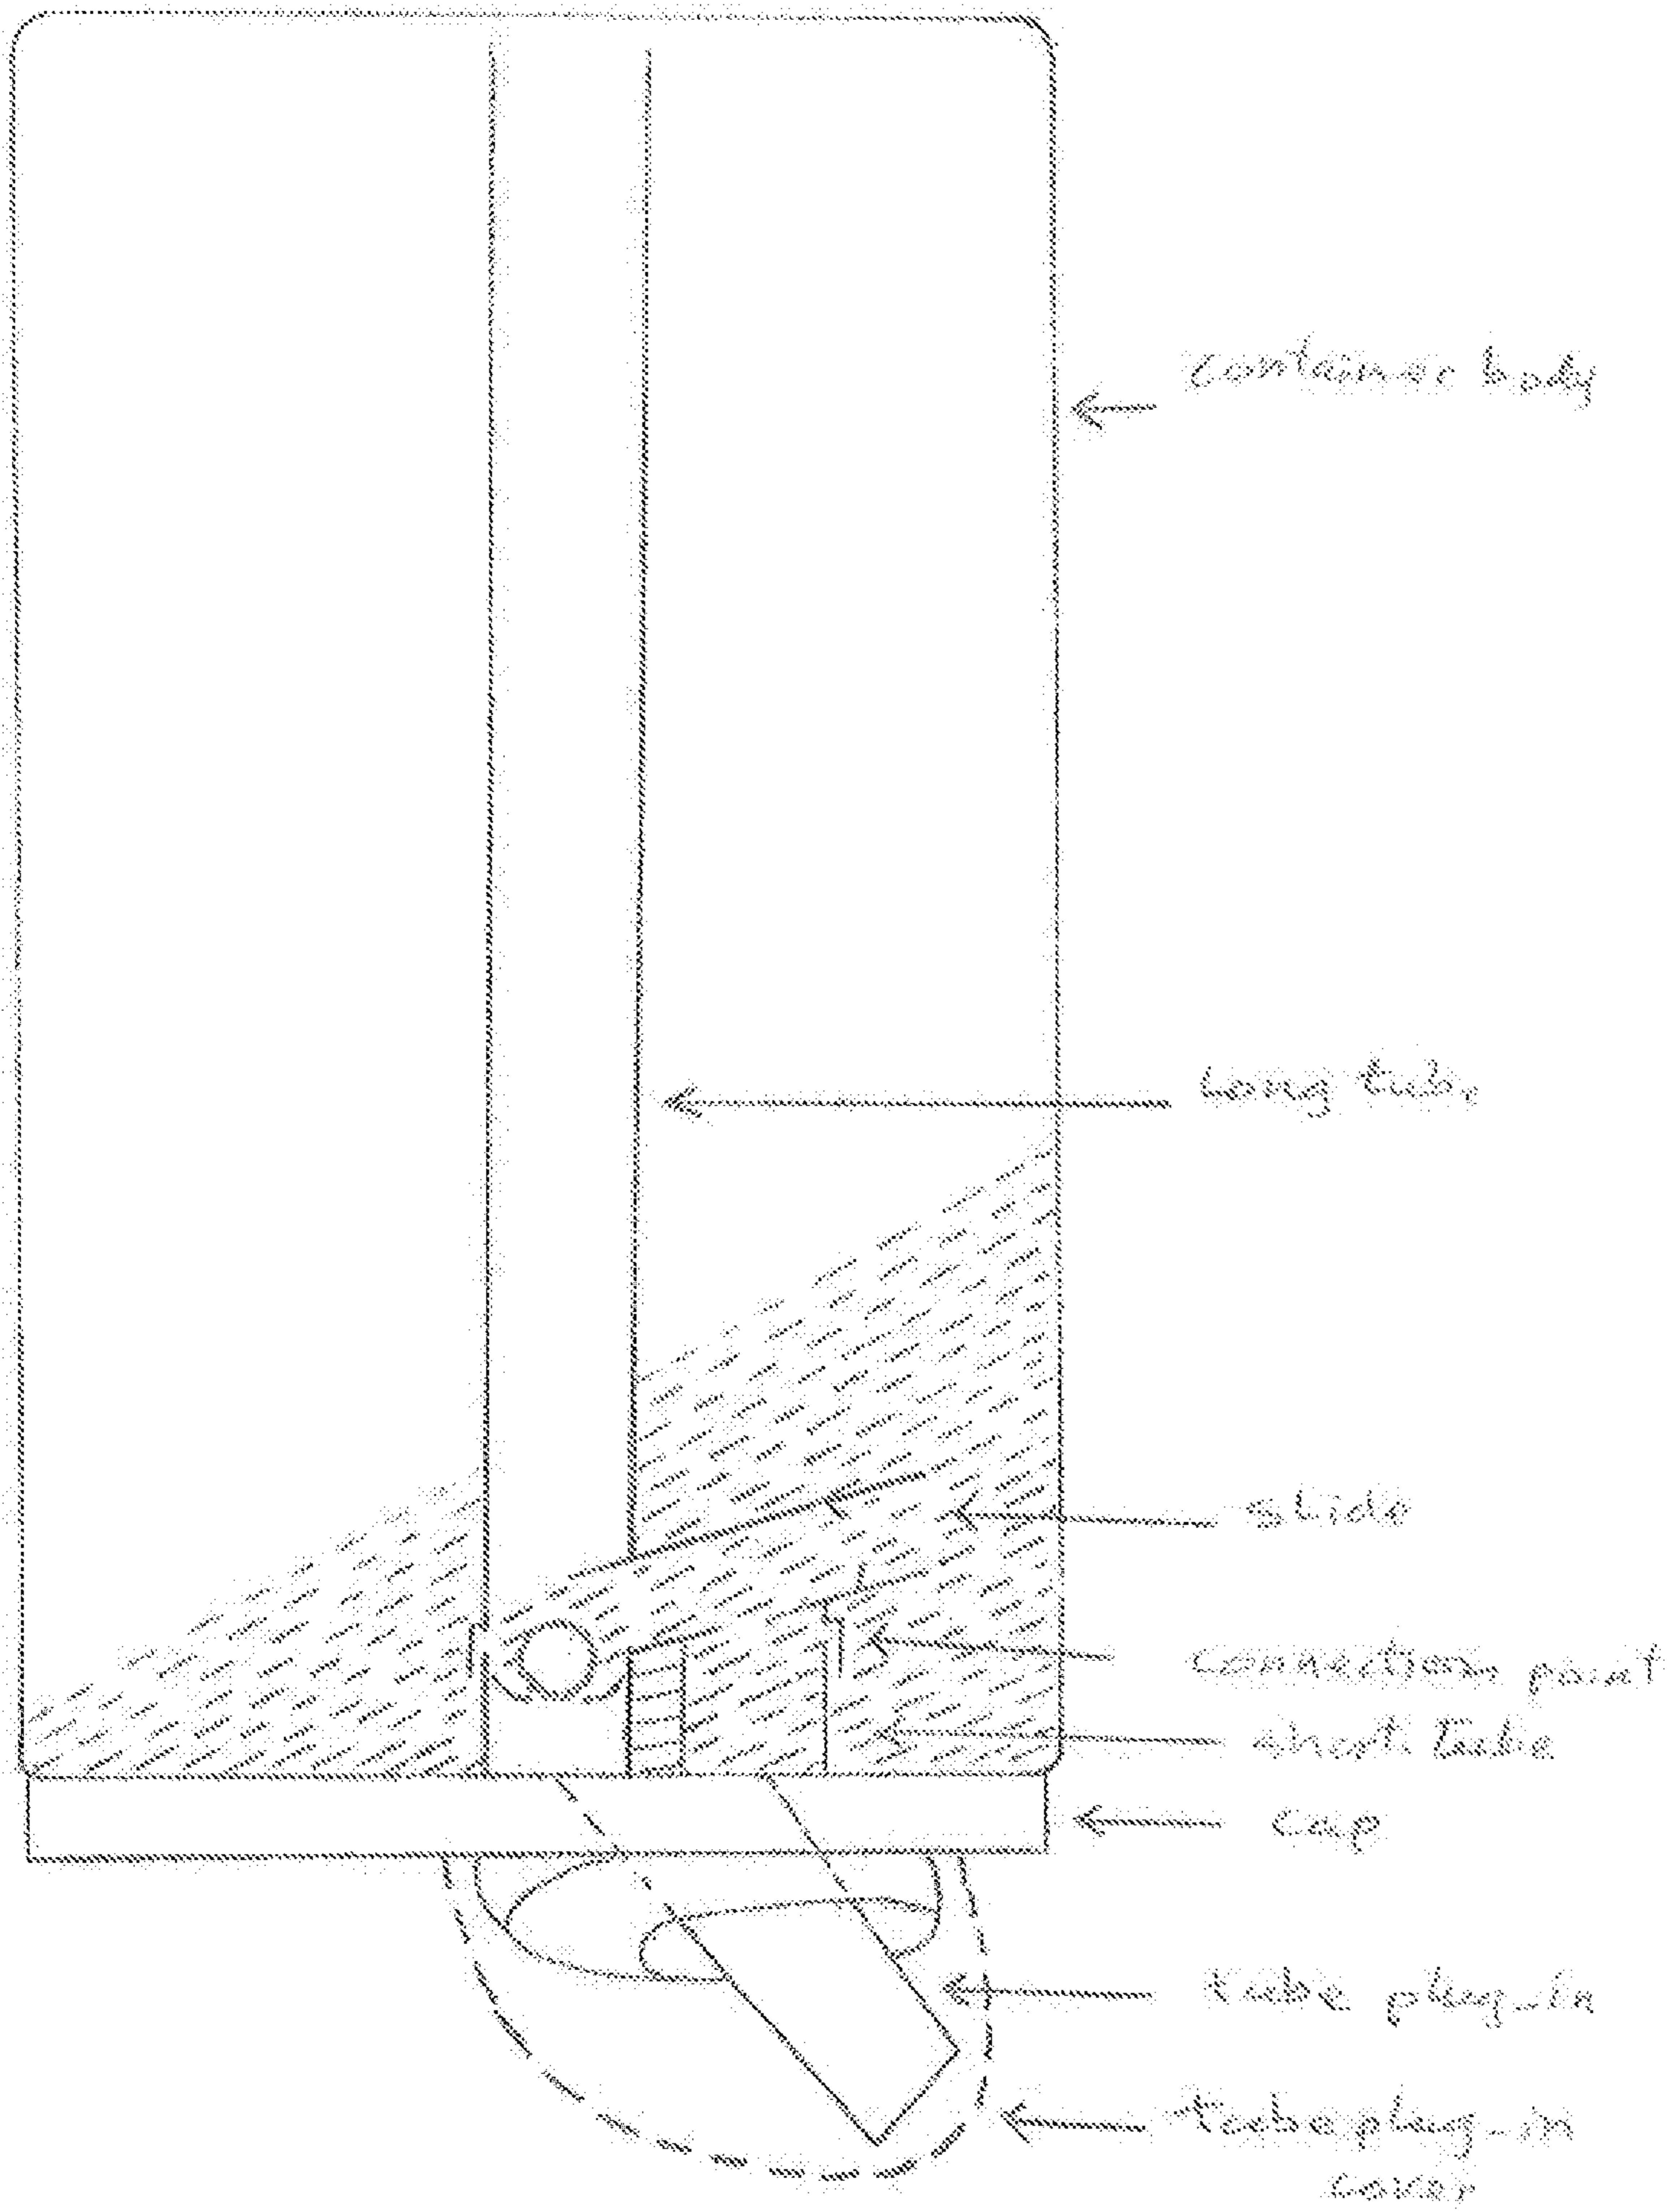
The slide bottom in place of the short tube bottom at lying position
